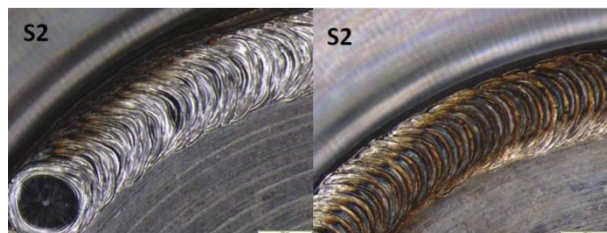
Weld beads with (left side) and without (right side) cover gas.
